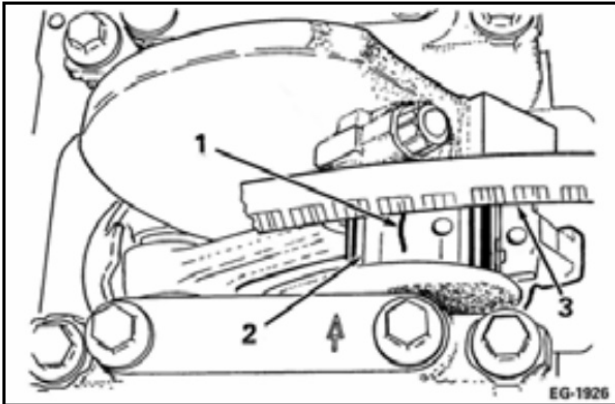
Measuring Bearing Running Clearance With Plastigage®
